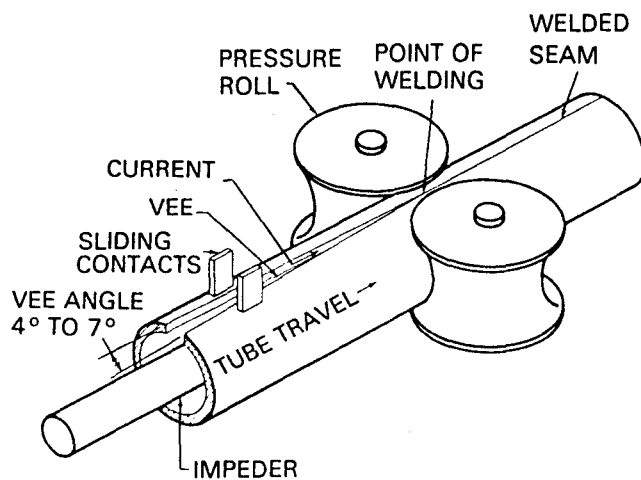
Joining a Tube Seam by High-Frequency Resistance Welding
